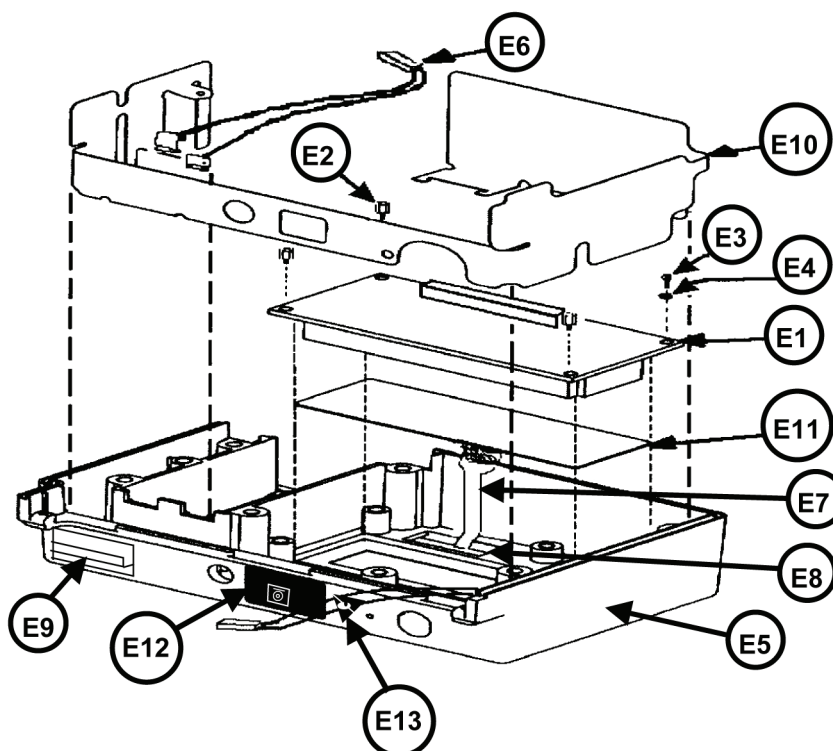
LCD Circuit Board & Front Case Assemblies
